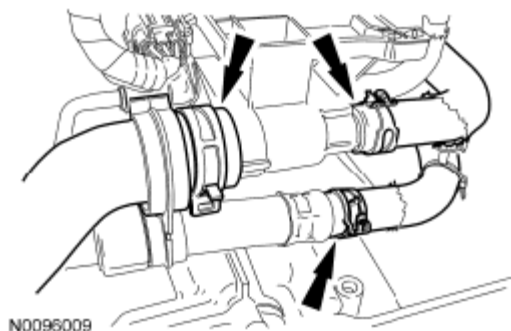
Locating Heater Hoses & Heater Hose In-Line Connector
